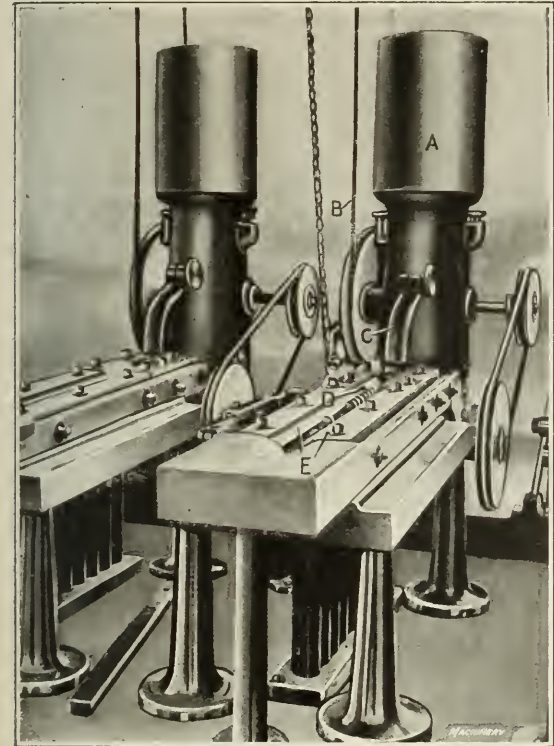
Automatic Ball Gaging Machine for inspecting Balls up to  $\frac{3}{8}$  Inch Diameter
